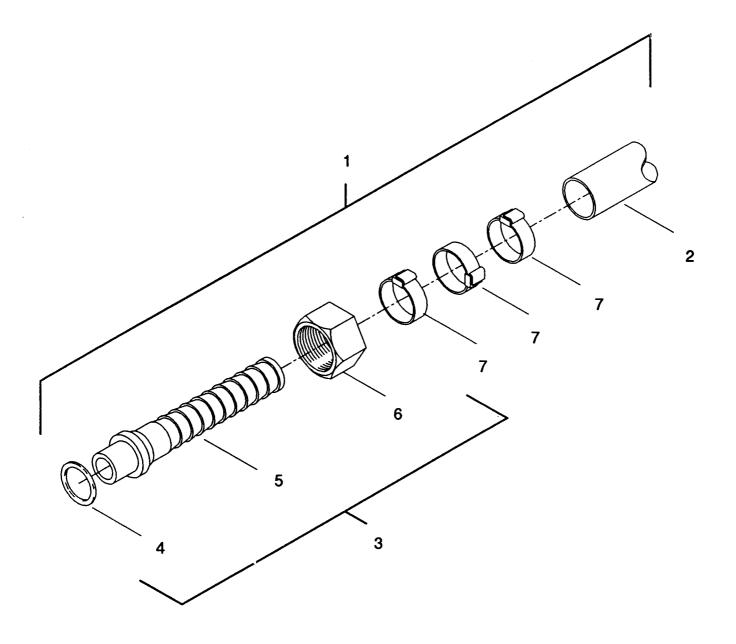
Low Pressure Hose Assembly (Item 1)
